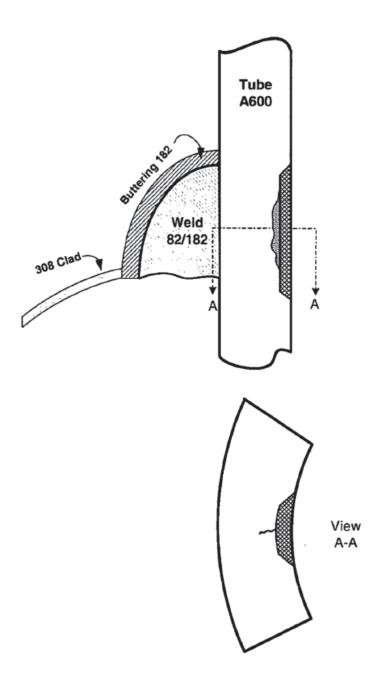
General Schematic of the Embedded Flaw Repair to a Flaw in the Head Penetration Tube Inside Surface
